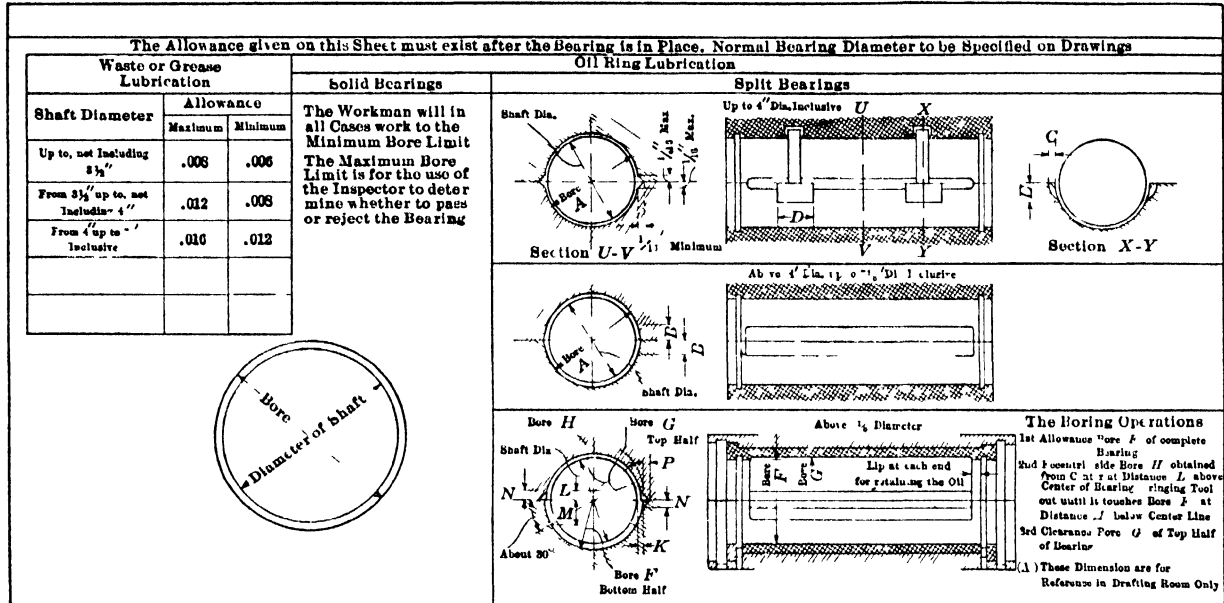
Standard bore finishes of Westinghouse babbit bearings
